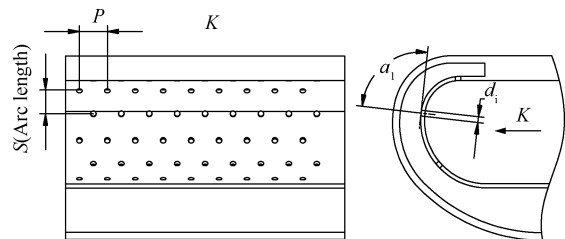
Impingement cooling structure parameter of concave wall (K is right side view)
